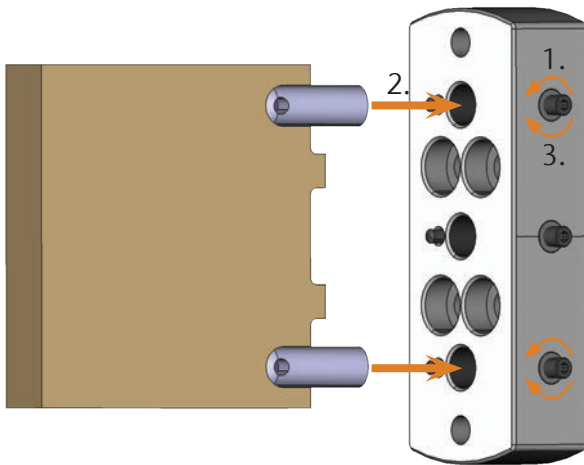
MOUNTING A BLANK FROM THE CALIBRATION SET INTO THE BLANK HOLDER
